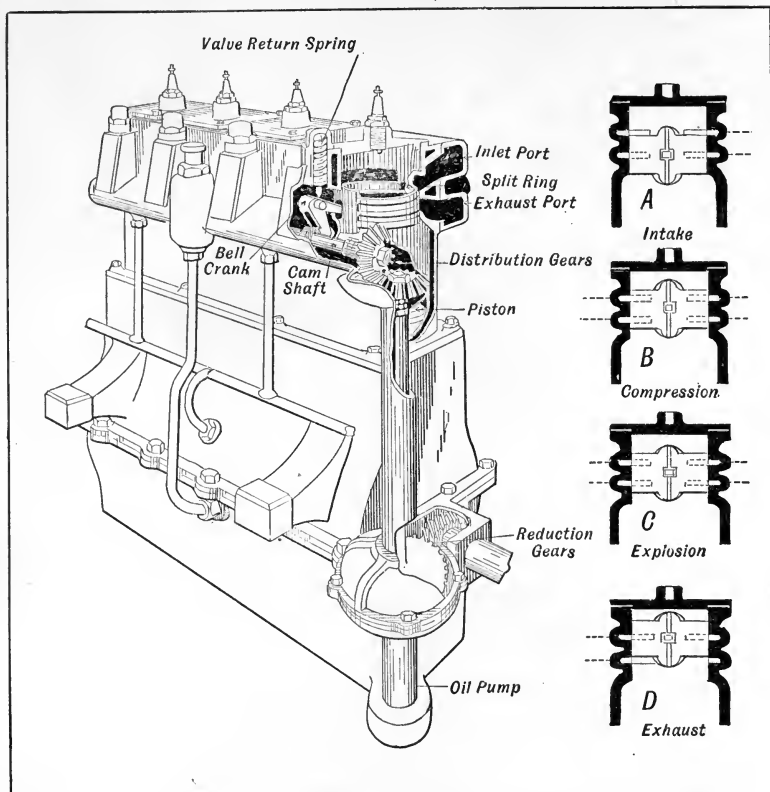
Part Section of Sphinx Valveless Motor in which Poppet Valves are Replaced by a Split Ring which Reciprocates in the Cylinder Head, Opening and Closing the Gas Ports as it Moves Up and Down. A—Inlet Ports Open. B and C—All Ports Closed. D—Exhaust Ports Open.
